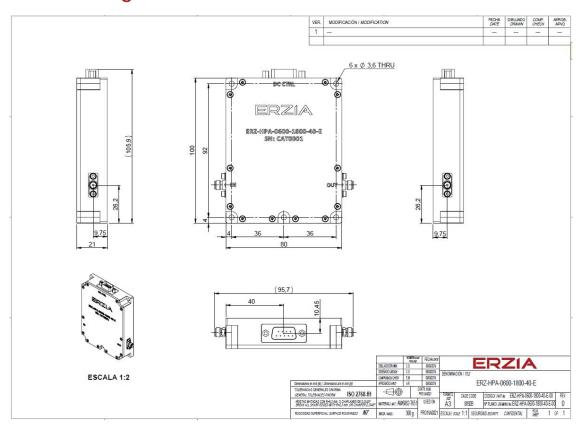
ERZ-HPA-0600-1800-40-E Outline Drawing
